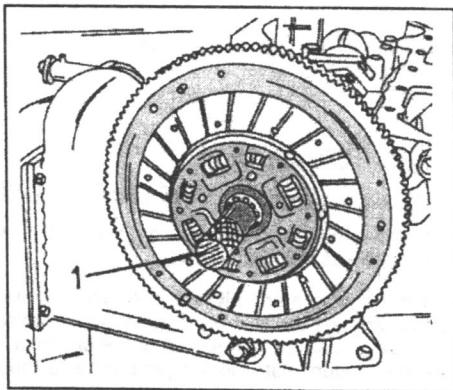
The centering mandrel is inserted into the fitted driven plate before the clutch unit is placed in position.
